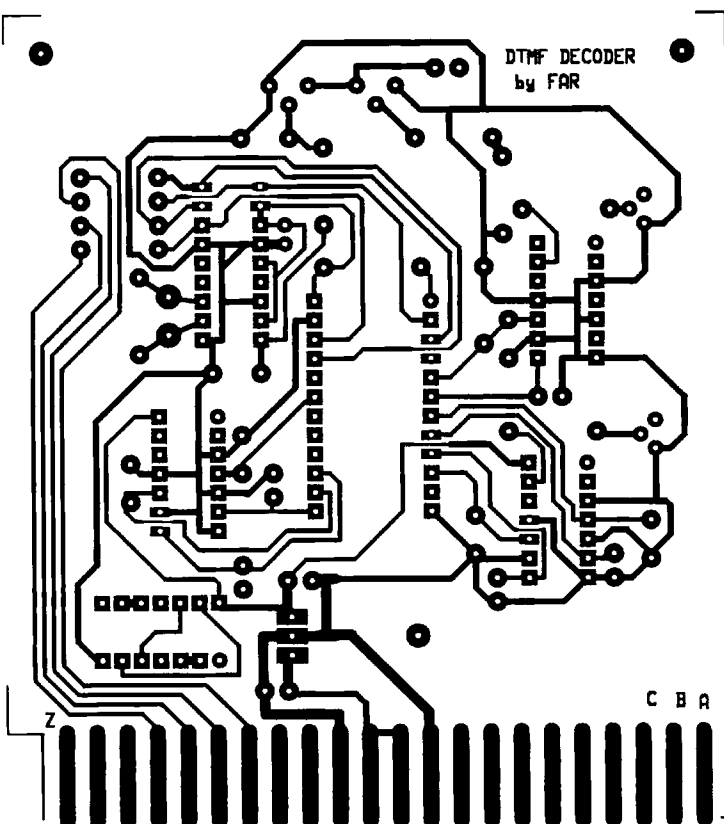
Touch-tone decoder PC board foil pattern (bottom layer).
